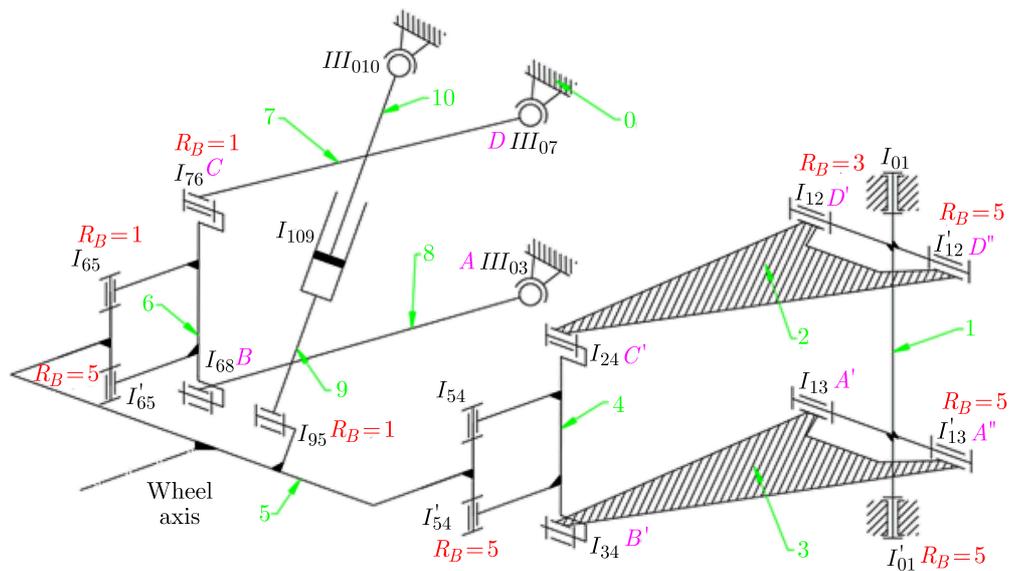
Kinematic scheme of the proposed suspension mechanism (view for one wheel)
